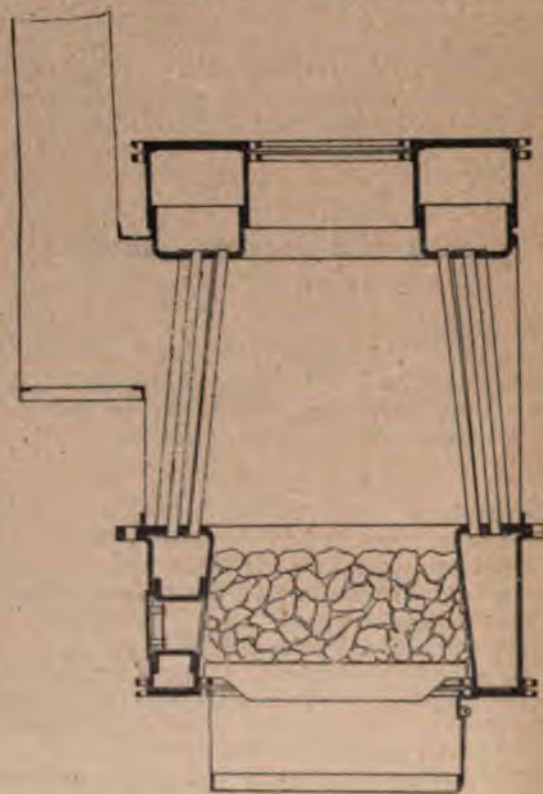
SECTION OF THE LATEST PATTERN THORNYCROFT BOILER WITH DEEP BOTTOM WATER RING, SO THAT THE IGNITED FUEL IS KEPT FROM ACTUAL CONTACT WITH THE BOTTOM OF THE WATER TUBES.
